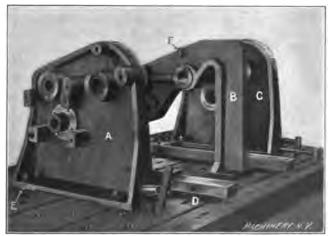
Boring Jig Consisting of Base-plate and Separate Removable Uprights carrying the Guide Bushings
